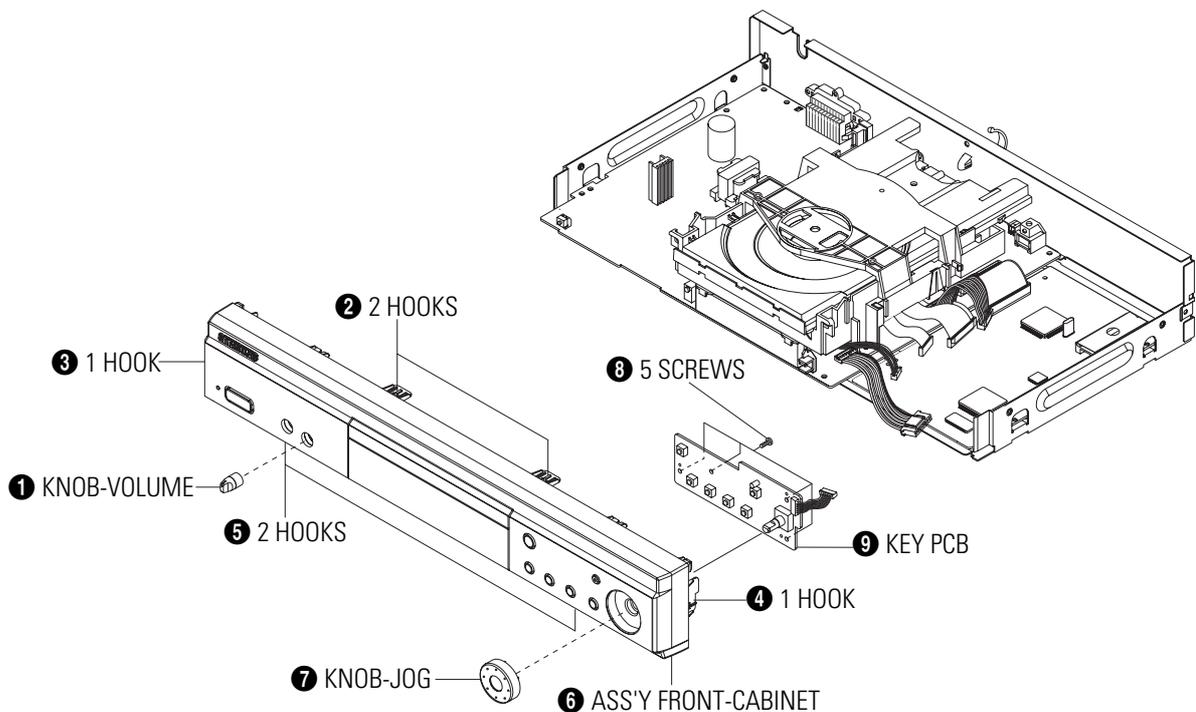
Ass'y Front-Cabinet Removal (DVD-S323/S324/S327/S423/S424/S427)
